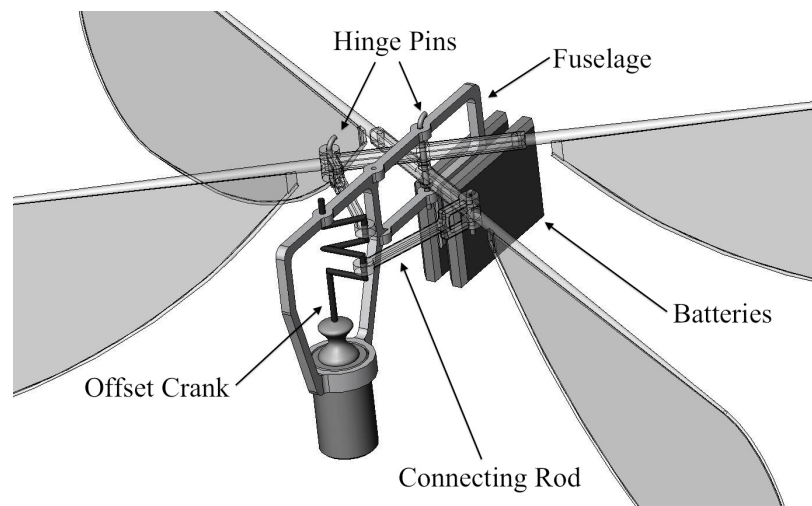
CAD model of mechanism showing offset crank and connecting rods to drive the wings.
